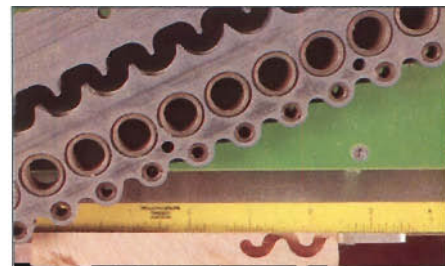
Photo A: First routed groove (partially completed here) establishes sockets for the crescents in end of drawer front/back.
